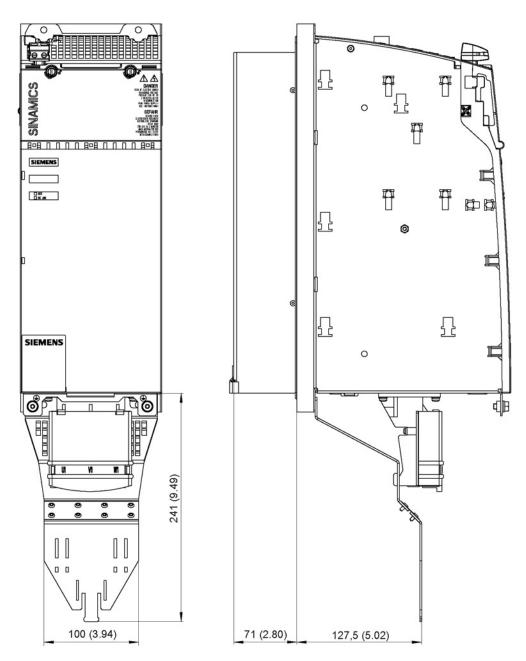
Dimension drawing of shield connecting plate on a 150 mm component with external air cooling, all dimensions in mm and (inches)
